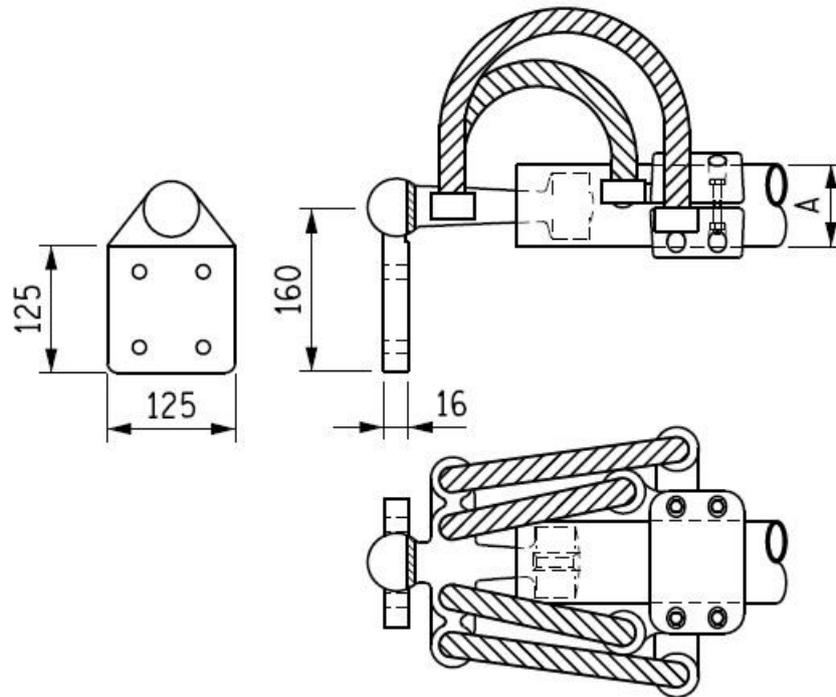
EEC-4HV: Expansion Clamp – 4-Hole Vertical Pad – Equipment Mounted (D-DT-6355)
